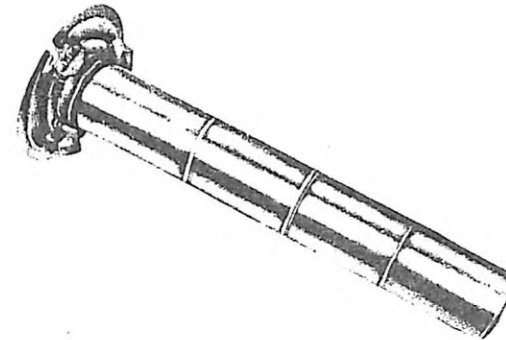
SNAP-27 Fuel Capsule Assembly
